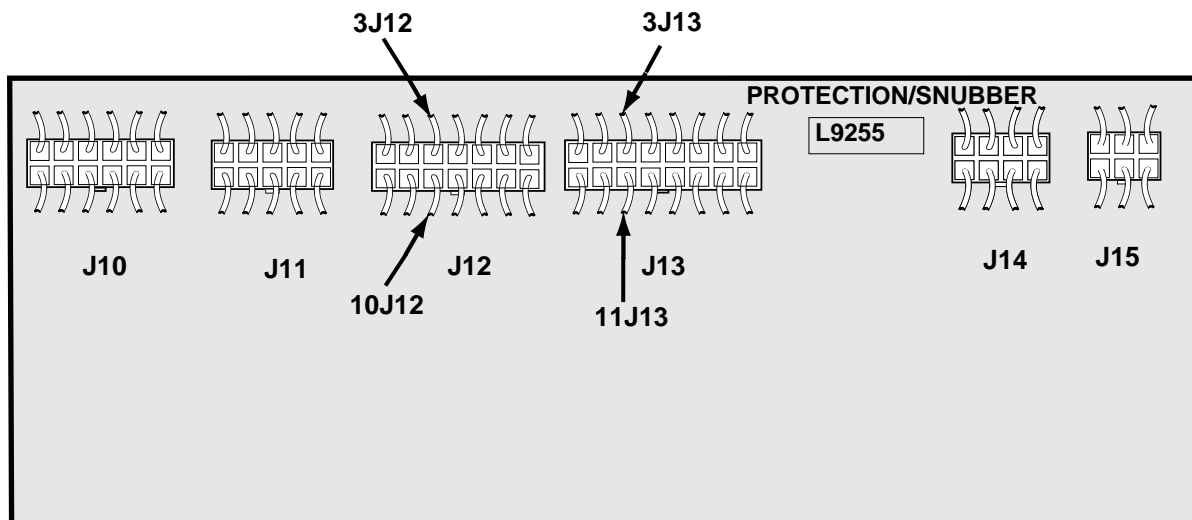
PROTECTION/SNUBBER BOARD TEST POINTS.
